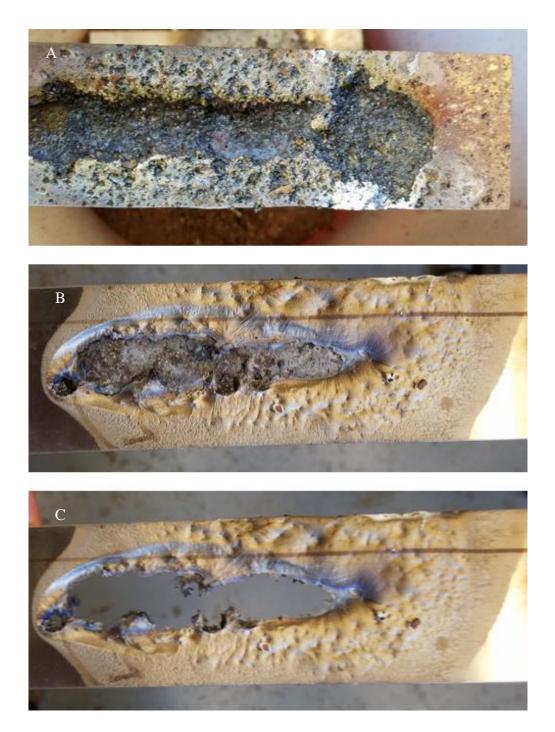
A) Top side of ignition 2, with slag. B) Bottom side of ignition 2, with slag. C) Slag removed, revealing hole
